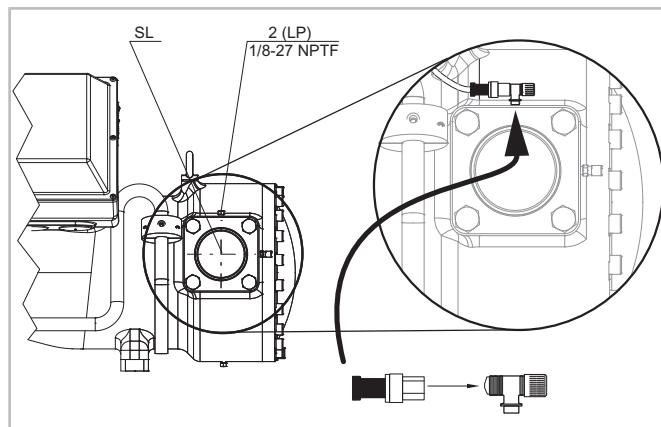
HS.85 compressors: Mounting of the low pressure transmitter
